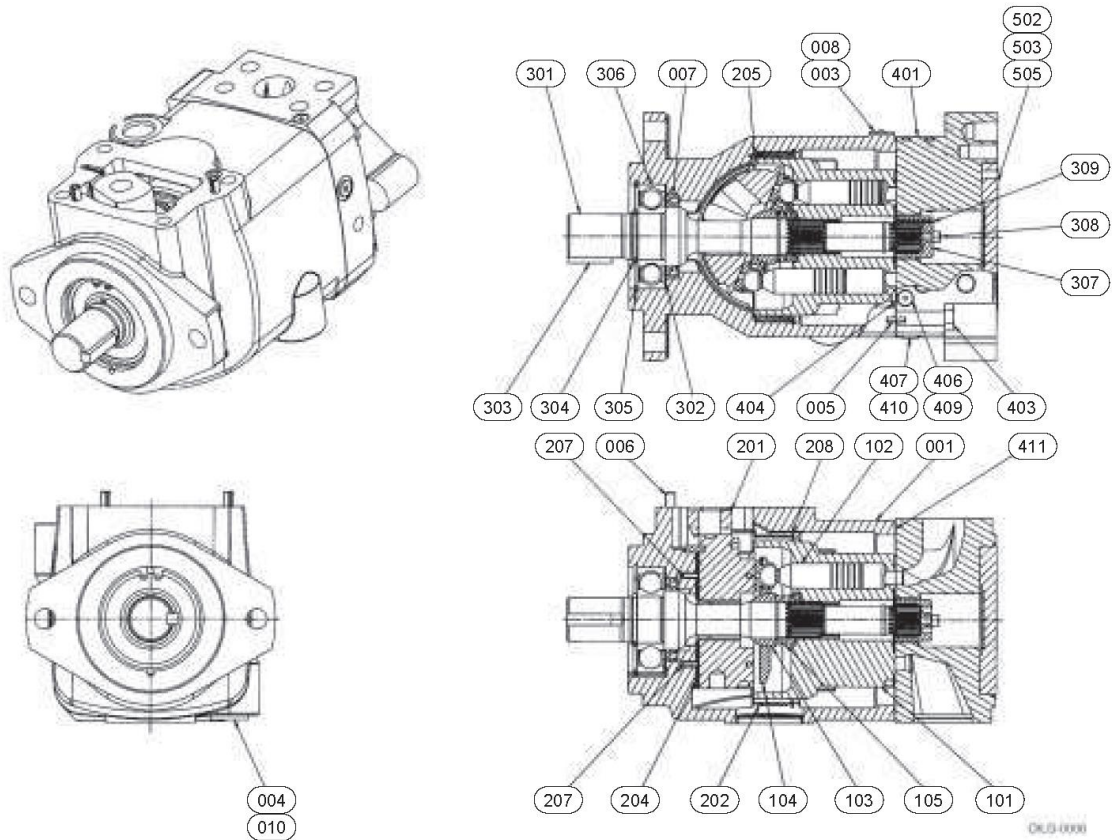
Cross section and plan view parts drawing, PVG 100/130 (516246 sheet 1 of 3).
